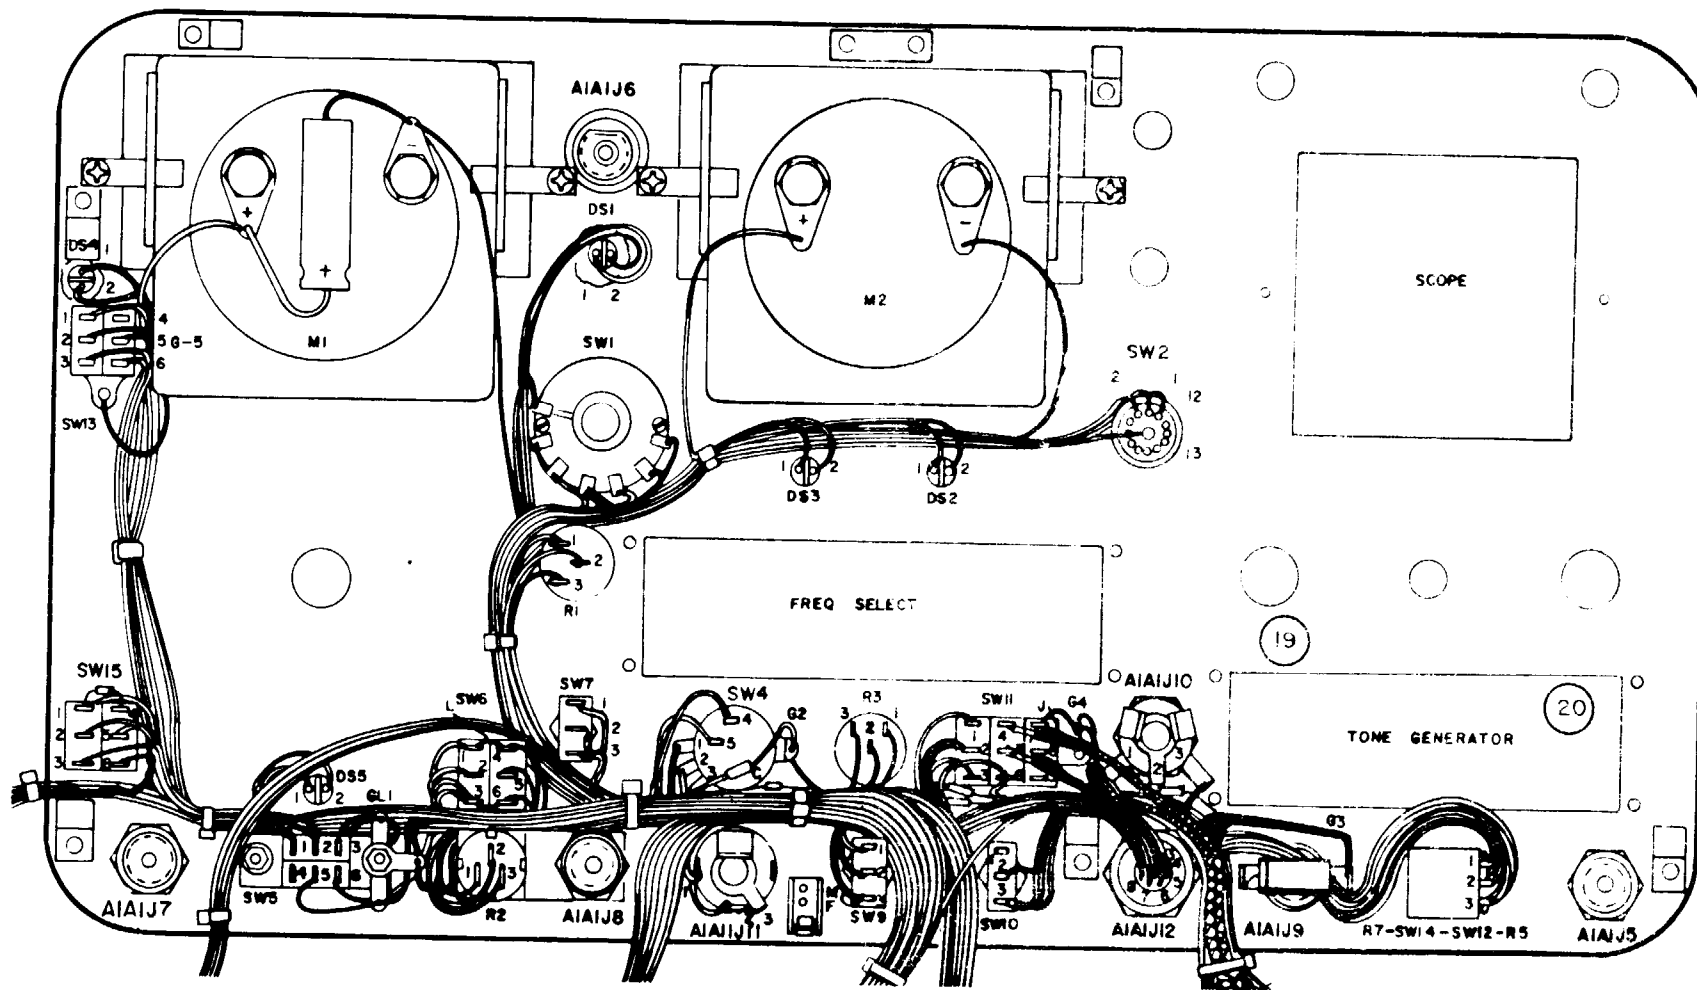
Front panel A1A1 (rear view) component location diagram
